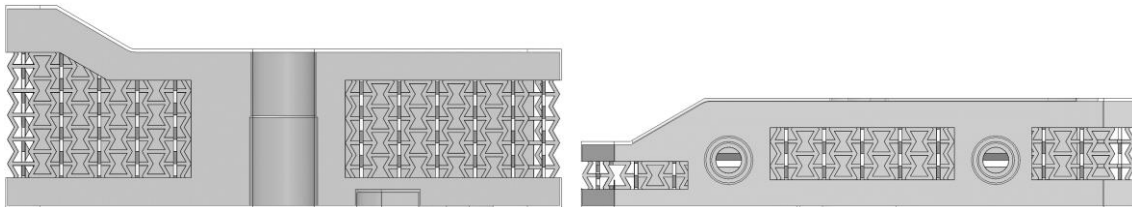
Schematic images of oversized moulding inserts to be produced by additive manufacturing.
